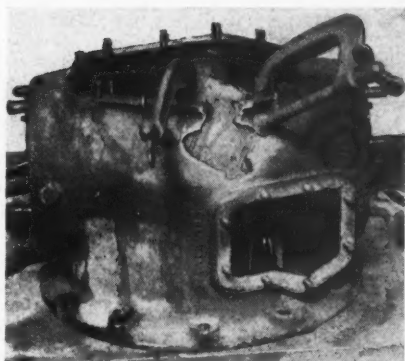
Piece shown in position for welding, with sheet of asbestos clamped in position to serve as retaining wall for the molten metal.
